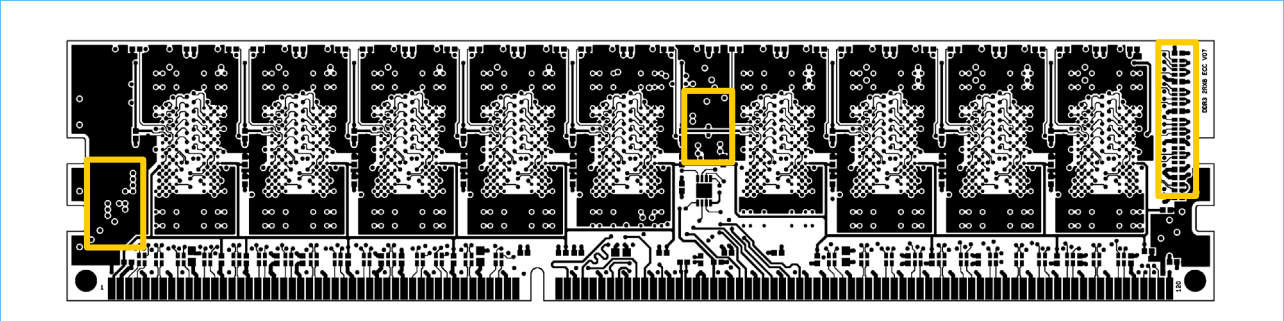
Test Point Identification (Raw Card Version E): Front Side View, Full Board
